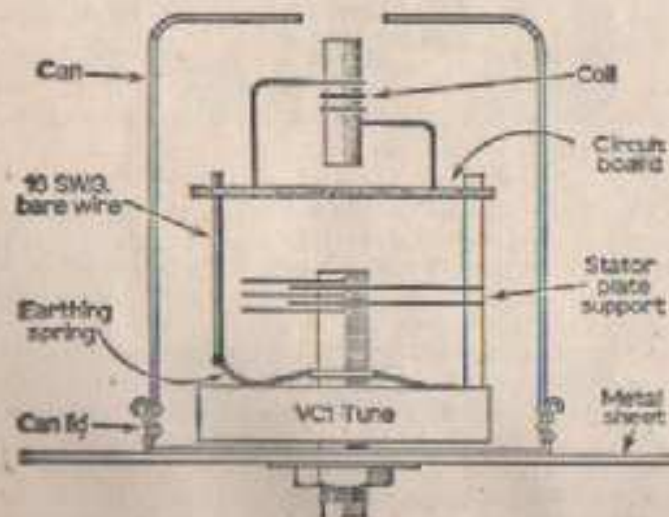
Oscillator 2 assembly. Note the positioning of the printed circuit board, and coil L1.
